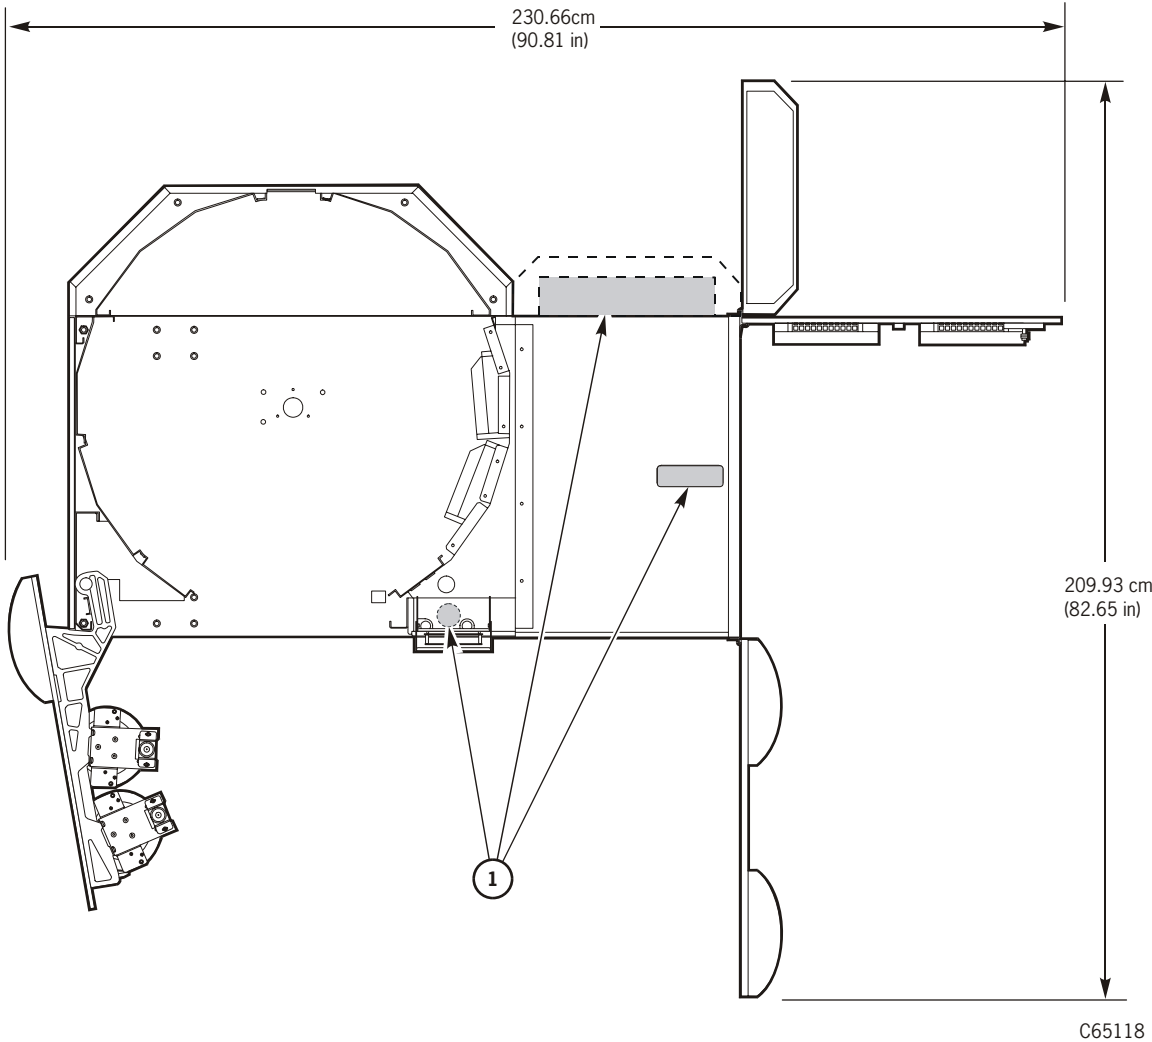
L700e Physical Dimensions—Detailed (C65299)
